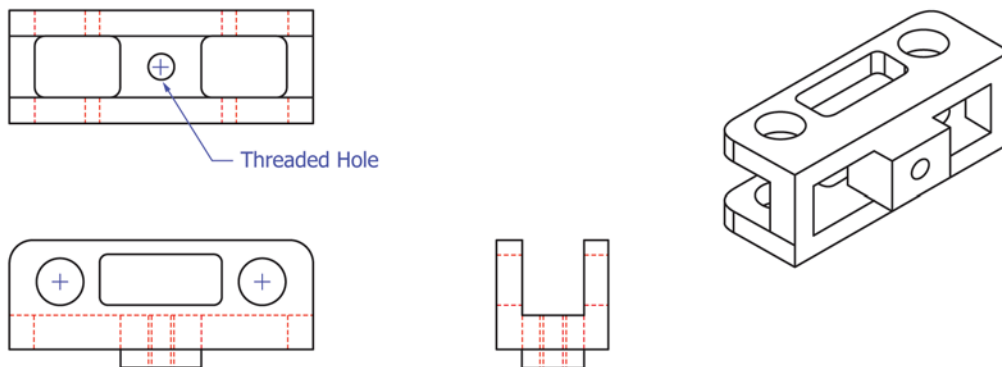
Example of a Bending Fixture Housing (quantity =2)
